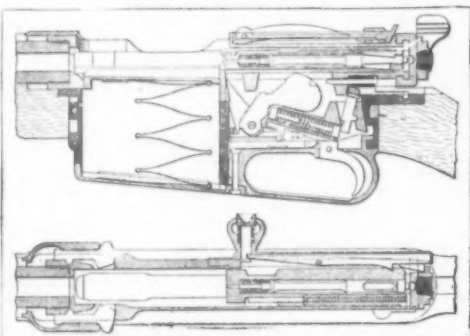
VERTICAL AND HORIZONTAL SECTIONS, WITH THE BREECH OPEN.
